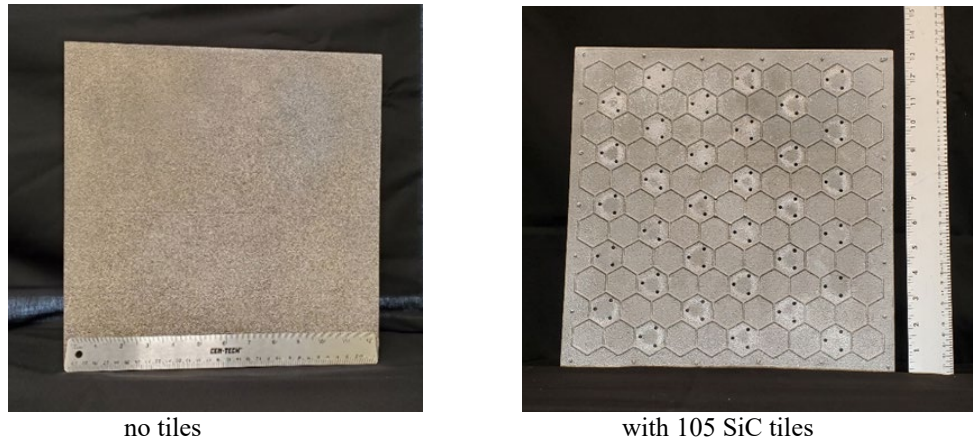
The largest lattice castings produced were 335 mm x 335 mm x 62 mm with no tiles or with one hundred five, 6 mm thick, SiC tiles in A356 aluminum alloy using gravity pouring.
